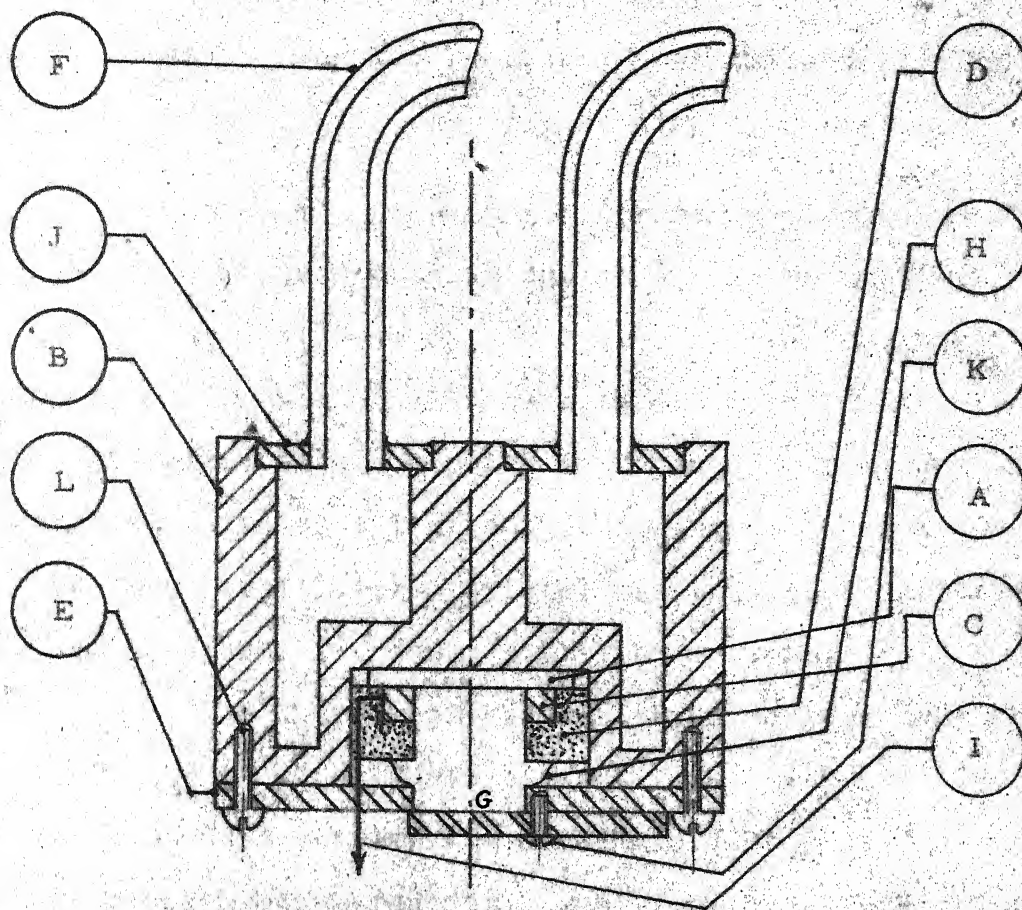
Sectional View of the Water Cooled Crystal Holder.
